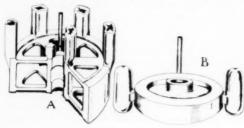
A shows a typical "H" arm wheel blank for a double helical drive, with a 43-in. outside diameter and weighing 1,100 lb net. Here again, the customer is naturally more exacting and expects a sound job, free from tears and shrinkage cavities.
